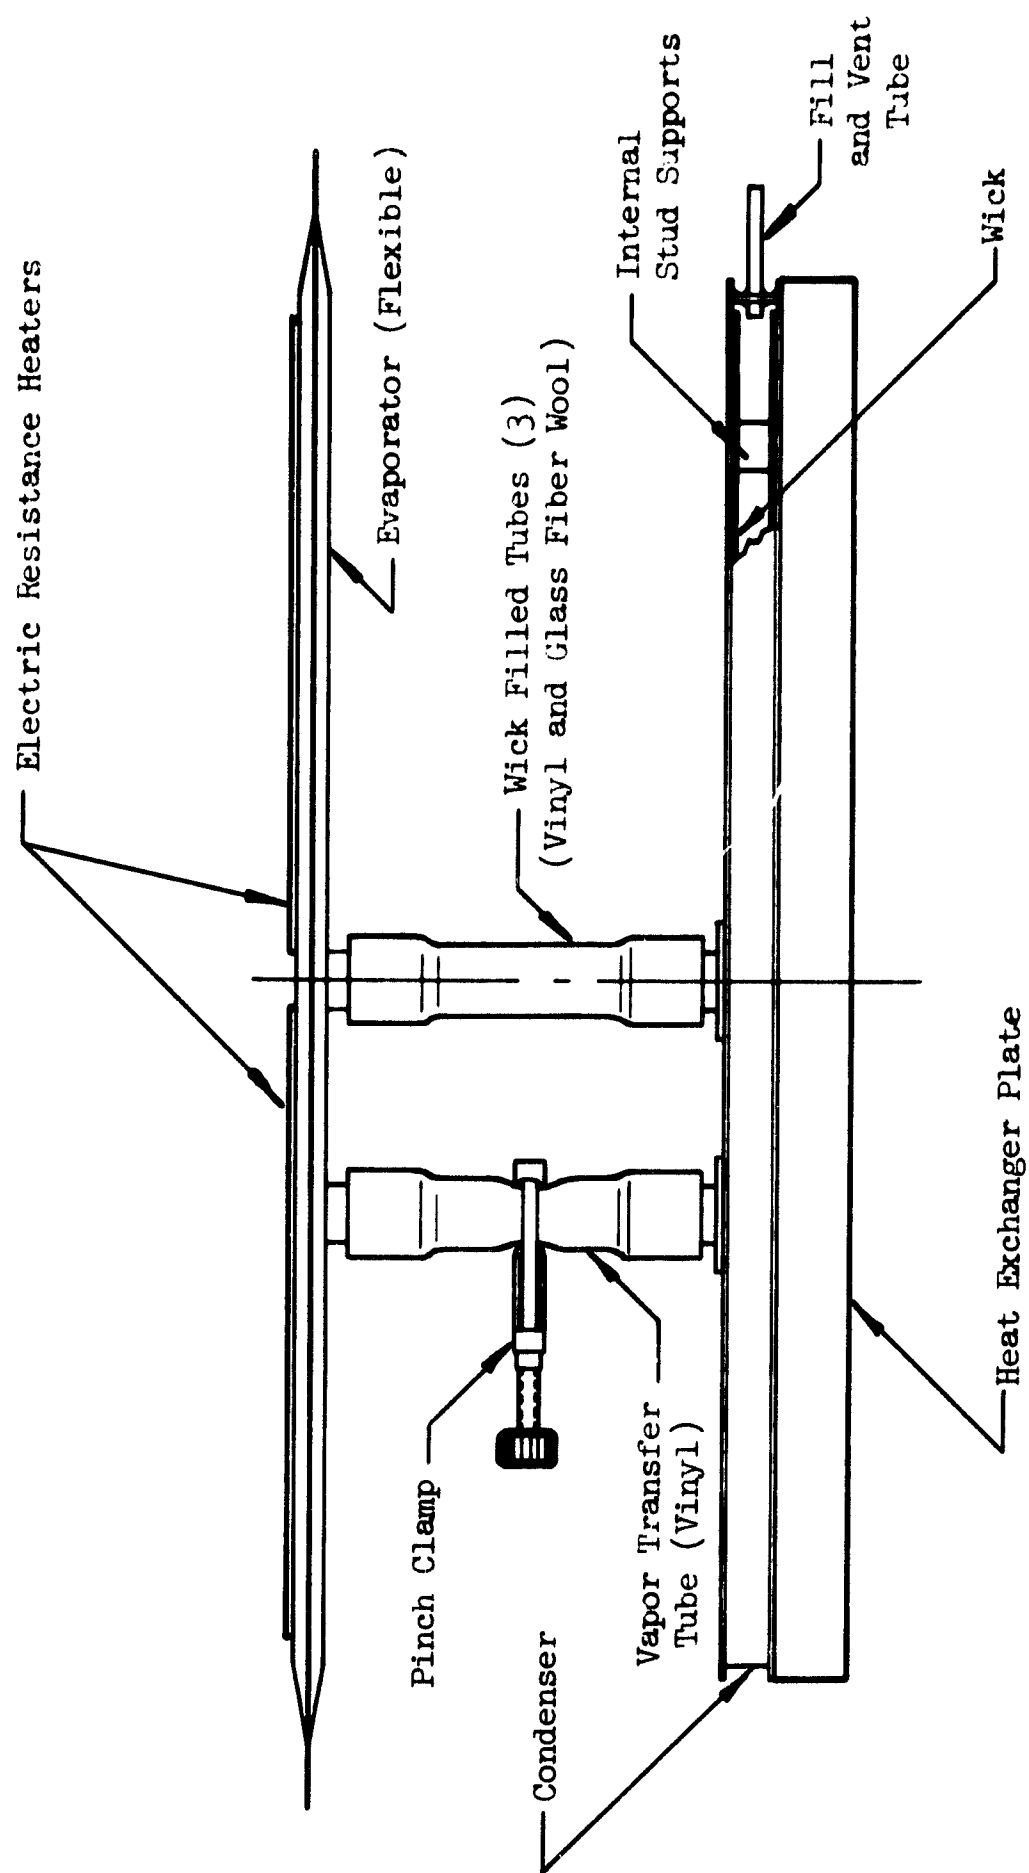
PROTOTYPE PANEL ASSEMBLY
